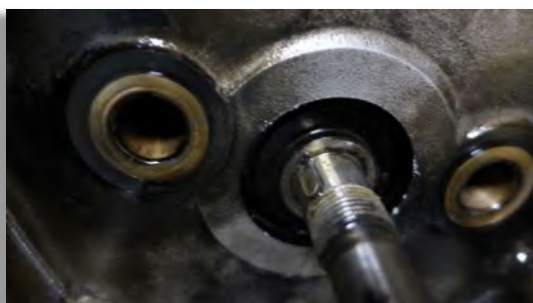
A perpendicular key on the crankshaft defines the unambiguous position of the timing gear.
